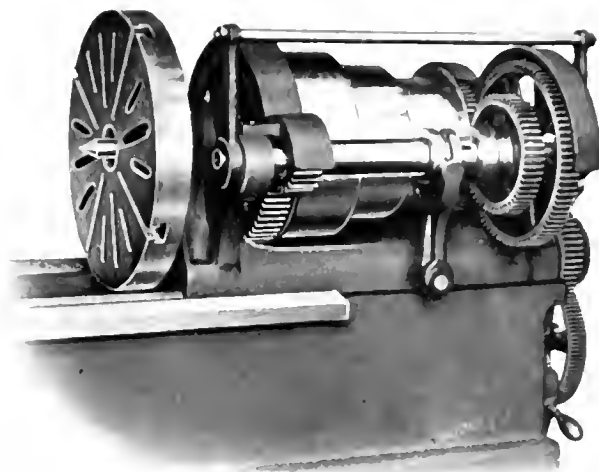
Rear View of Head-stock, showing Arrangement of Double Gearing
